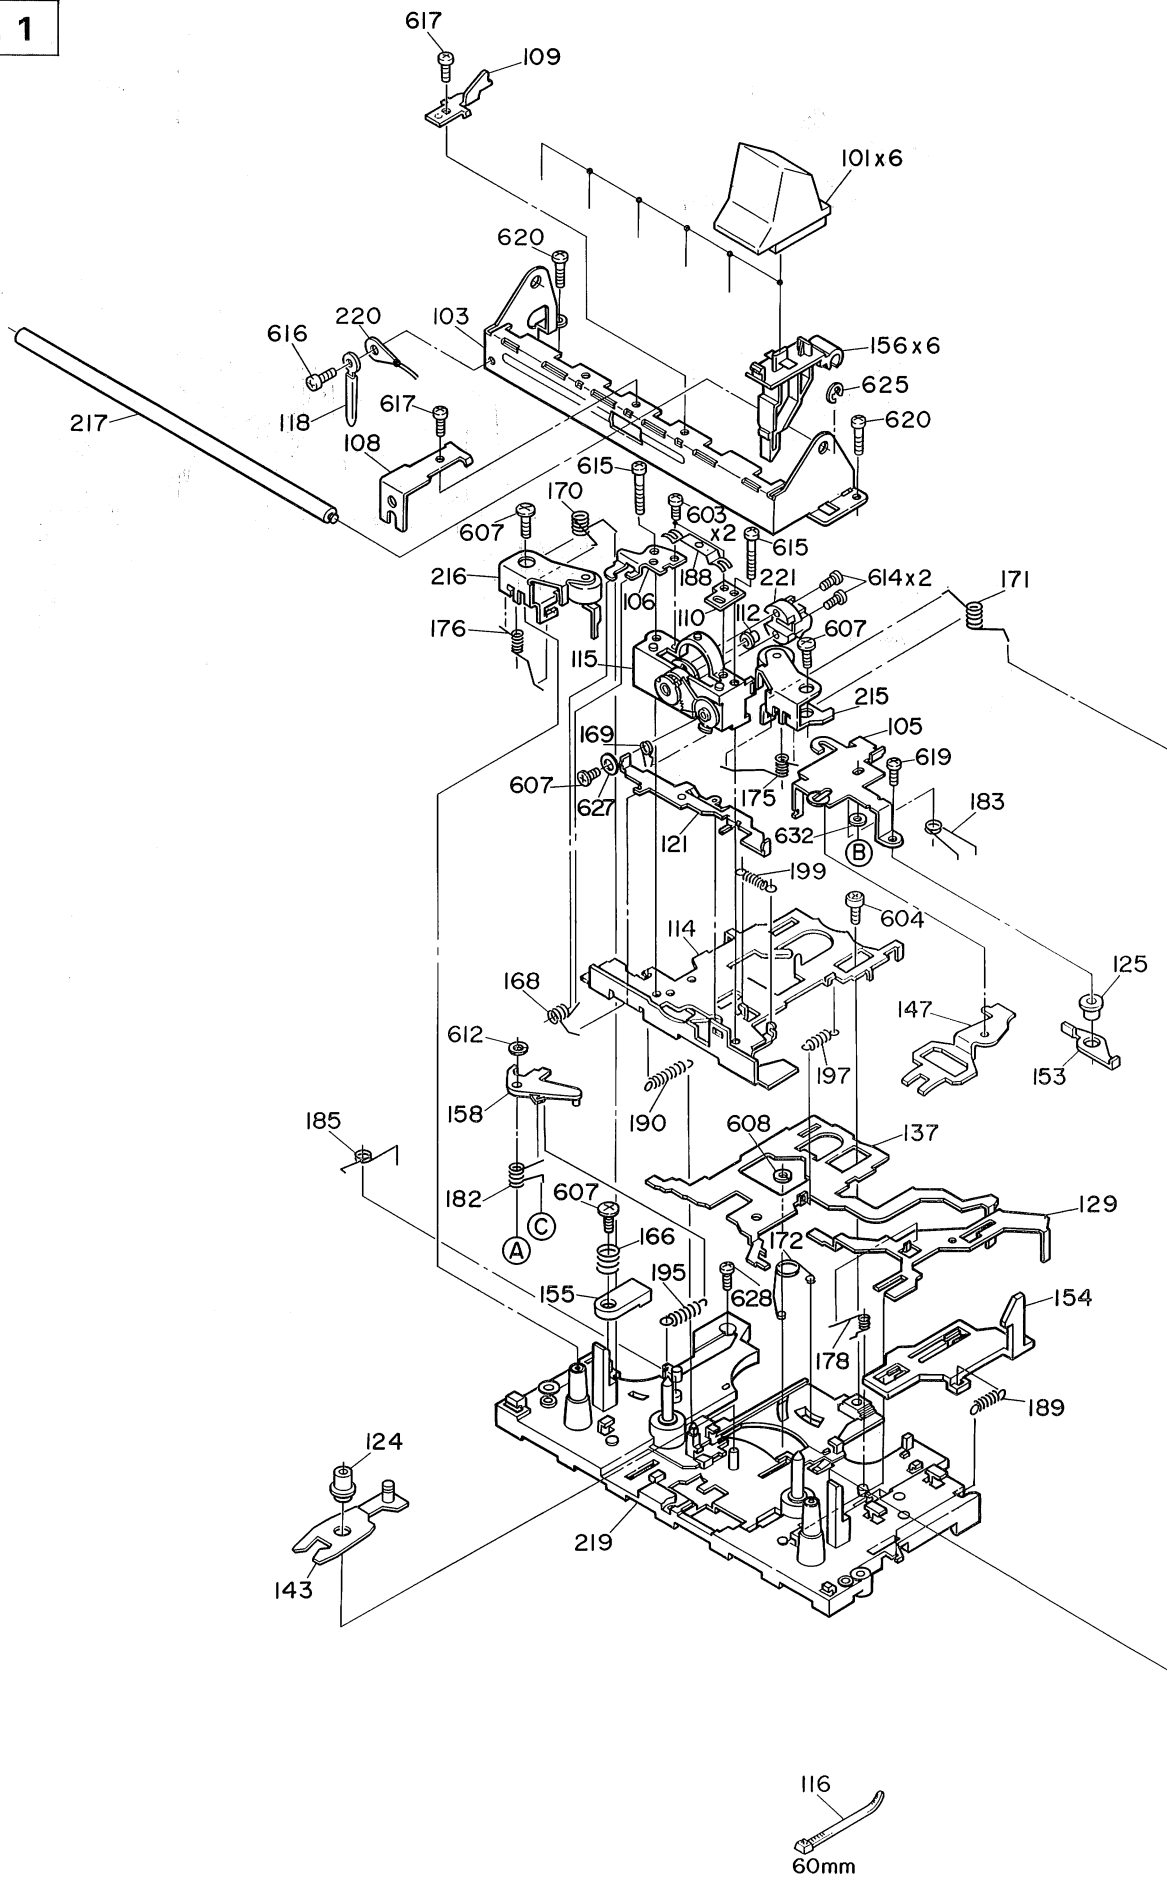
TAPE MECHANISM EXPLODED VIEW (1/4)
